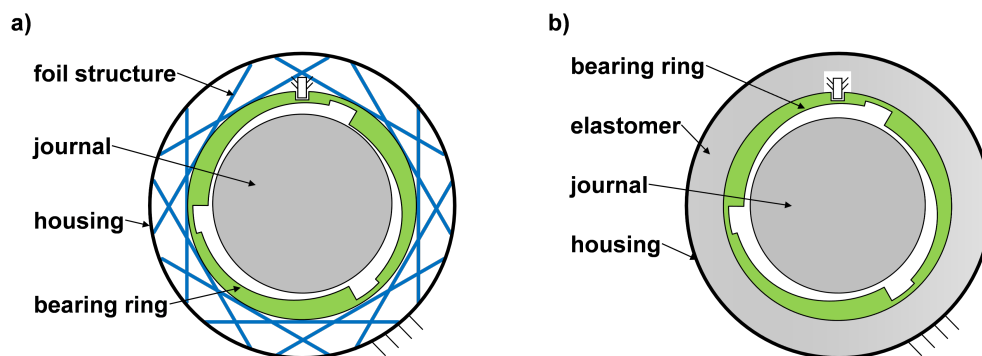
Air ring bearing with (a) foil structure and (b) elastomer (visco-elastic mounting), see [41]
